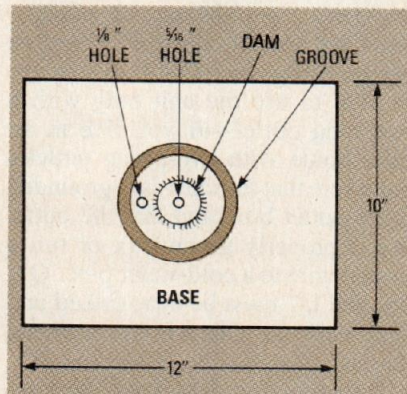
PREPARE THE BASE by drilling two holes, routing a mounting groove, and building an epoxy dam between the two holes.
